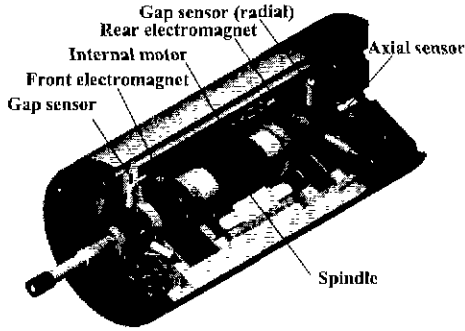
The high speed spindle system with cone shape magnetic bearing for internal grinding
